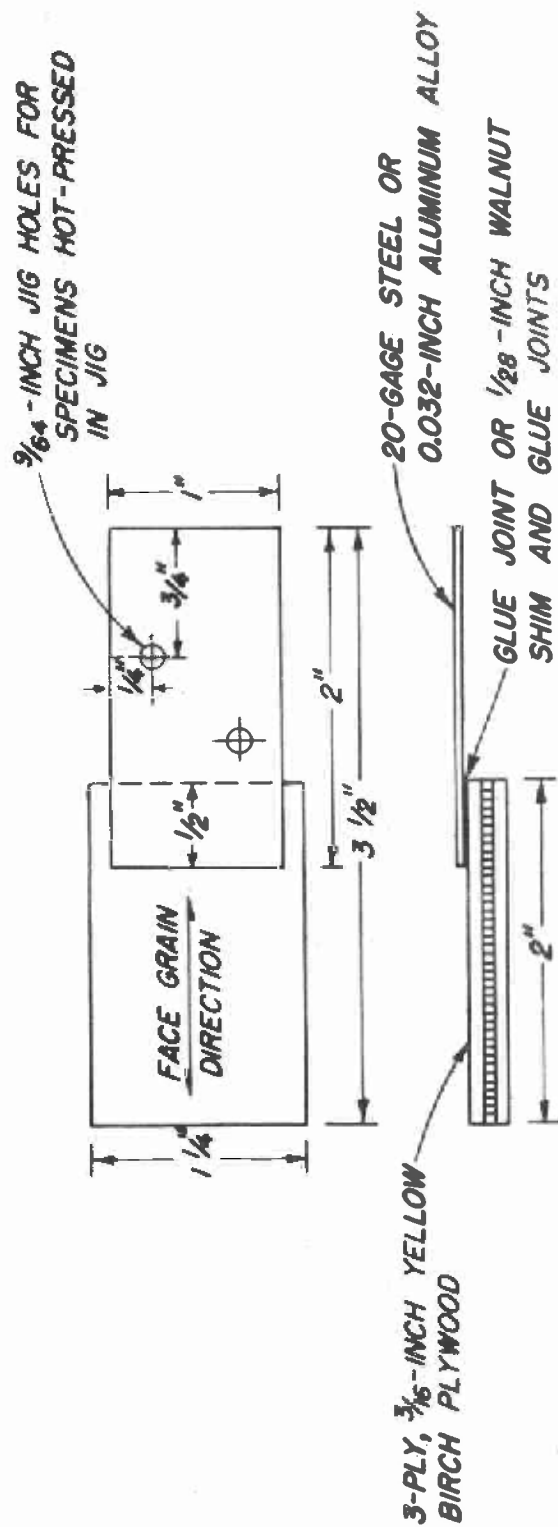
Plywood-to-metal glue-joint test specimen with and without walnut shim.
